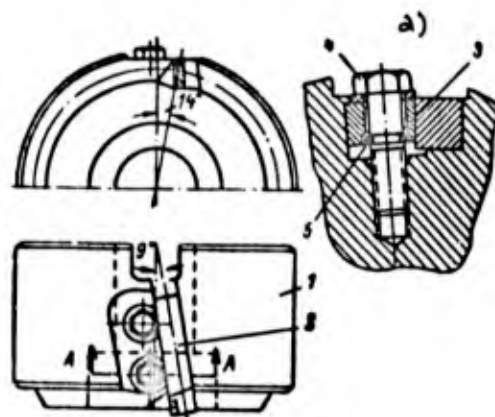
Design of Carbide-Tipped, 110 - 150 mm Diameter Inserted Tooth End-Milling Cutter
